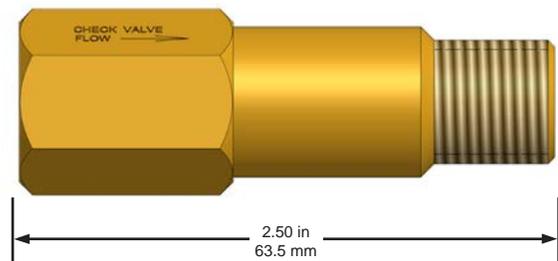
NPT Style Pilot Actuation Check Valve
